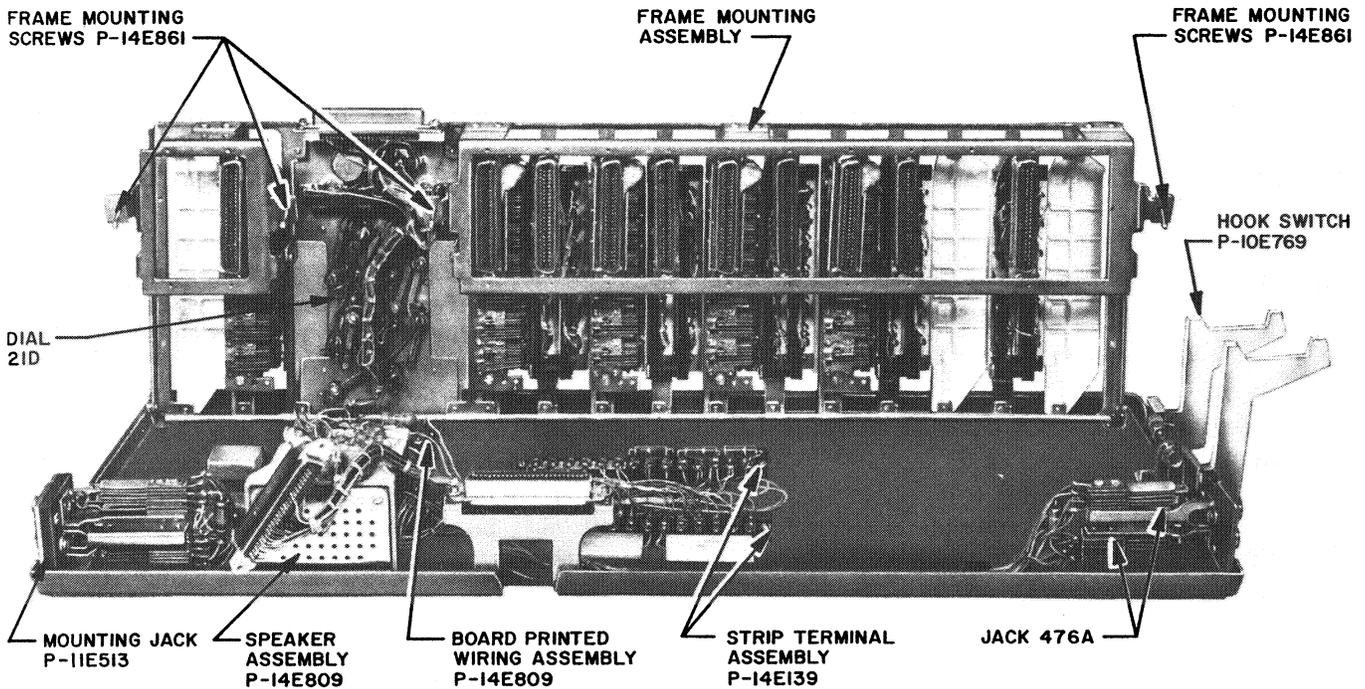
2A-Type Telephone Console, Frame Mounting Assembly Raised
